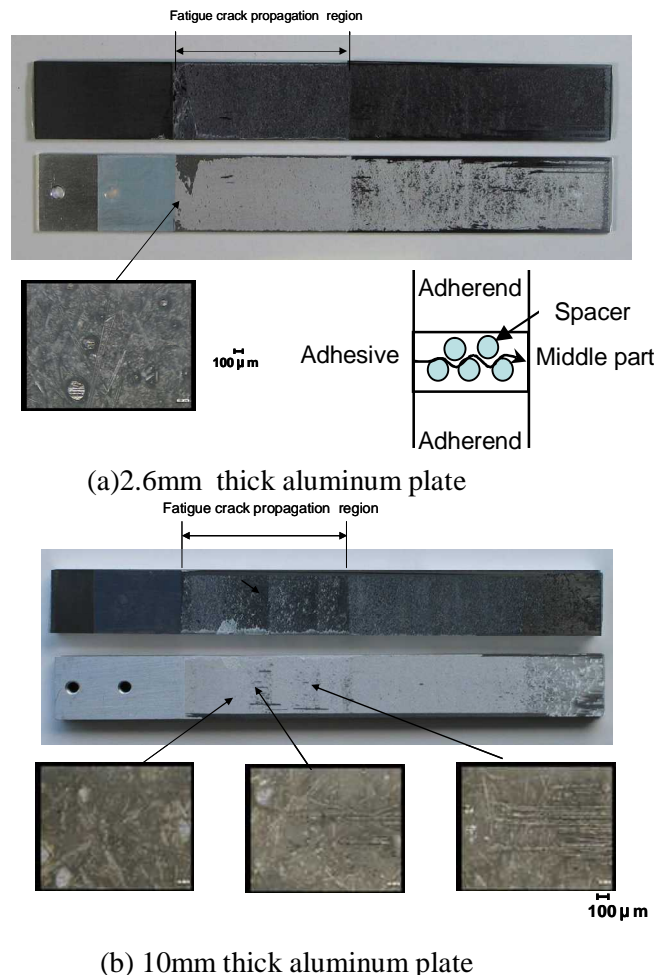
Fracture surfaces of CFRP/aluminum joints.
